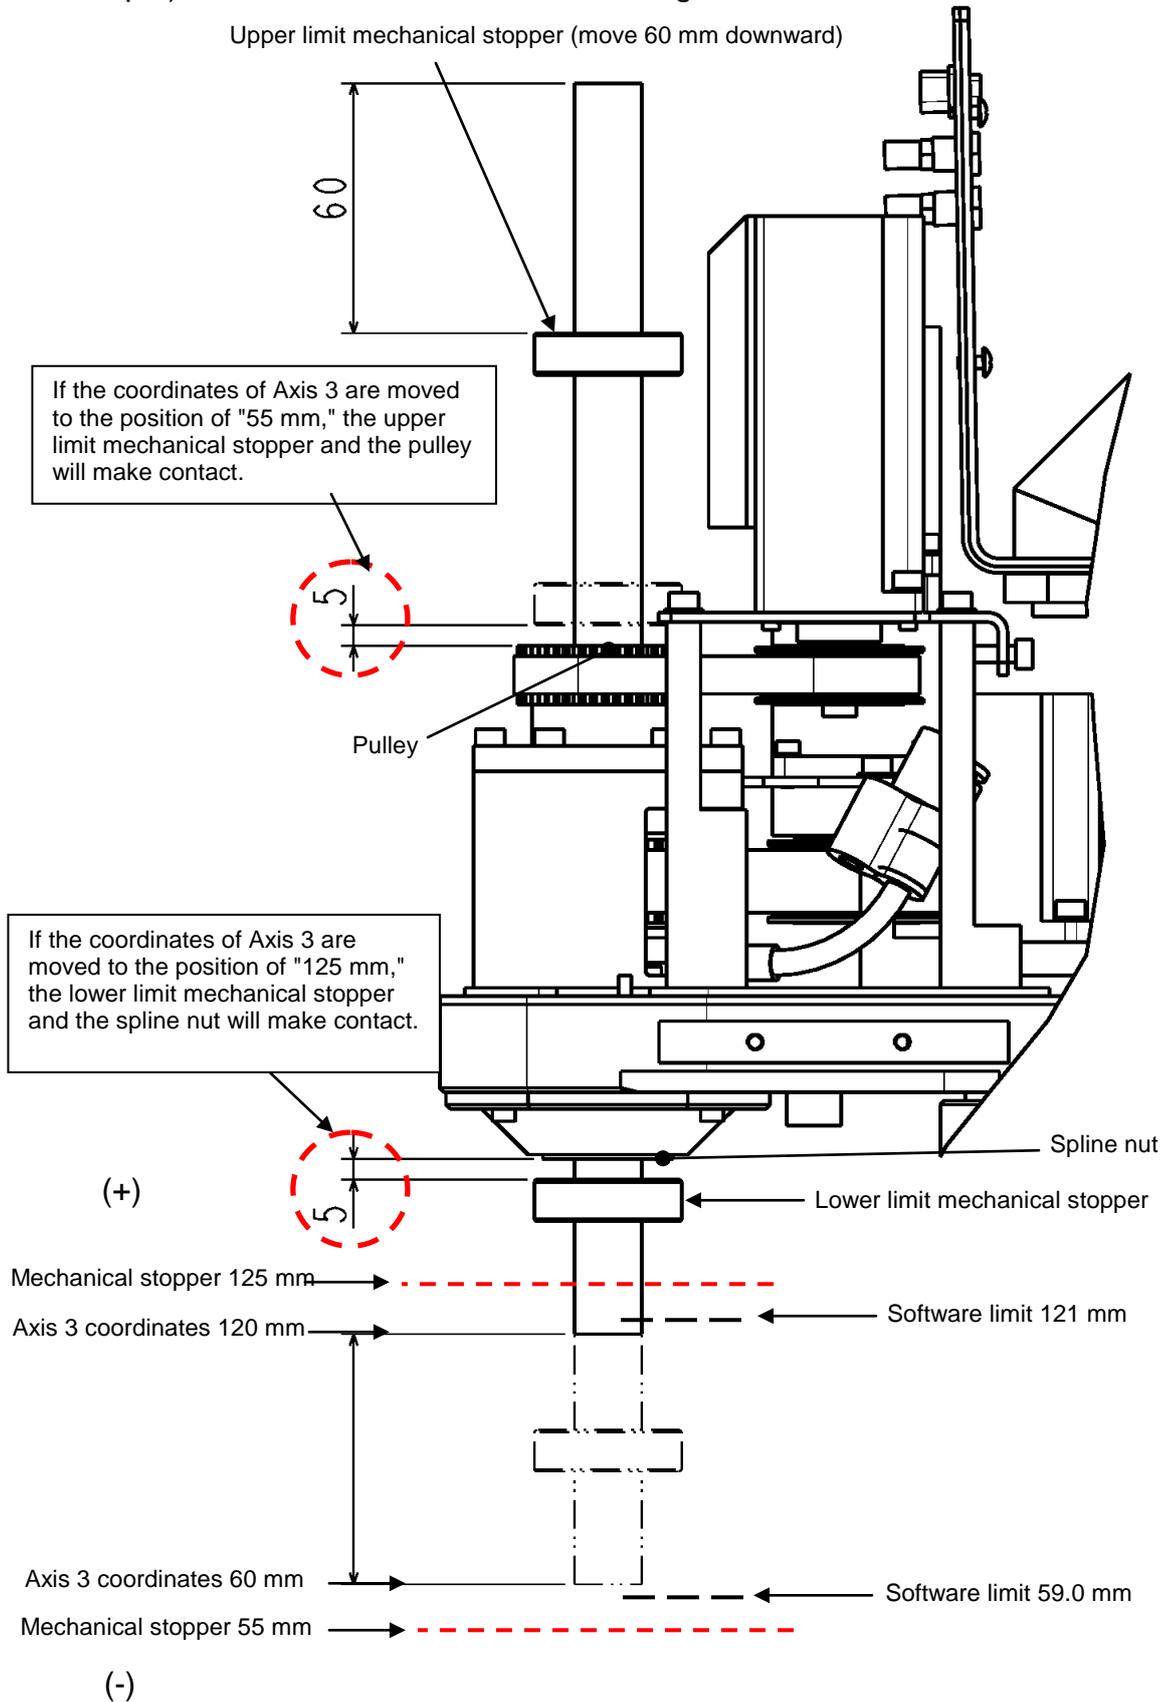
Example of changing the mechanical ends of Axis 3
